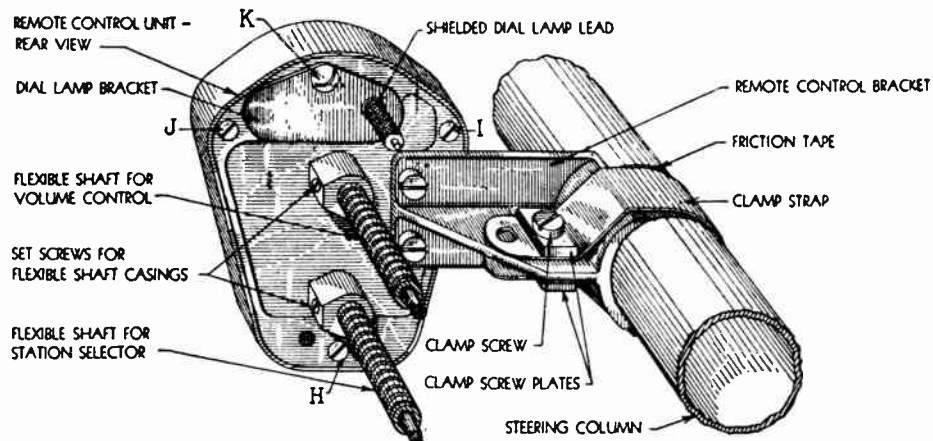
Mounting of Remote Control Unit on Steering Column.
